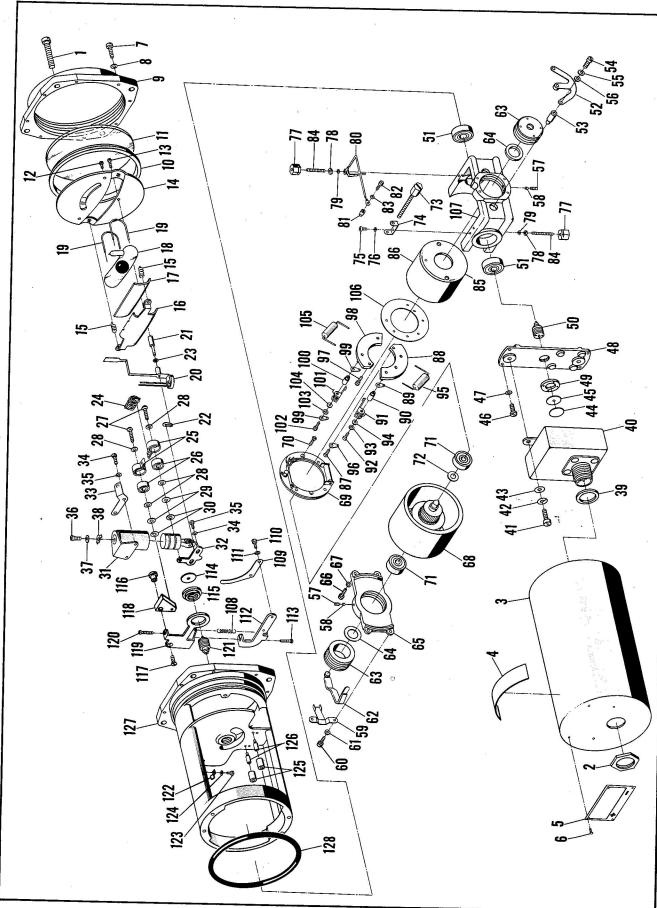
Bank and Turn Indicator Assembly, Model B4B-D
